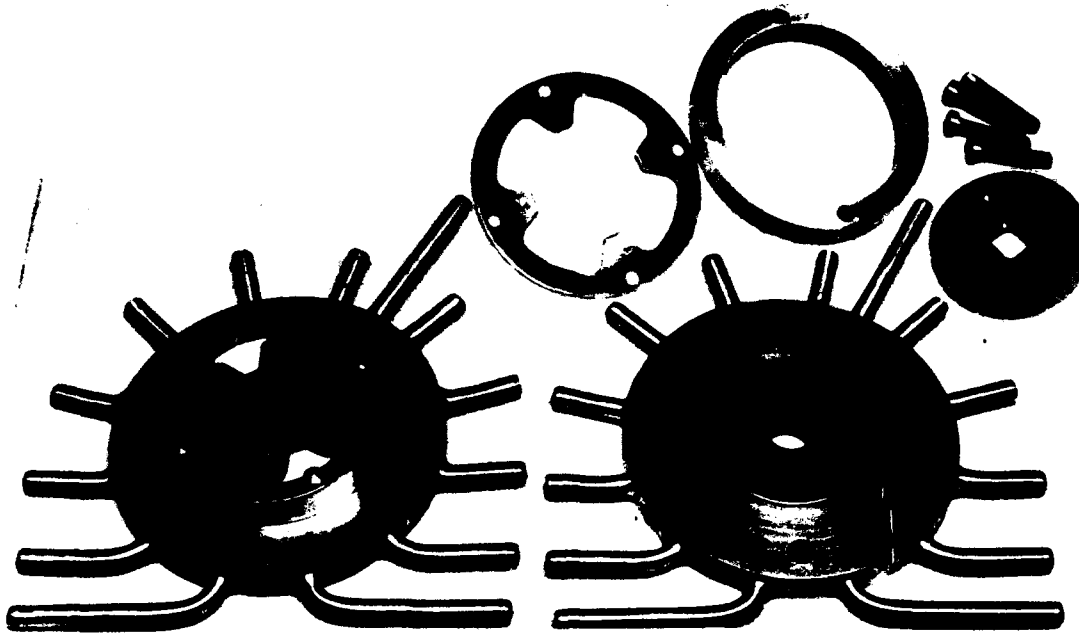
Boeing 12-point pressure selector valve wafer assembly.
